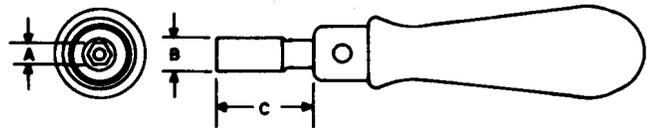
46 and 47 Hex, Single-End Socket Wrenches
